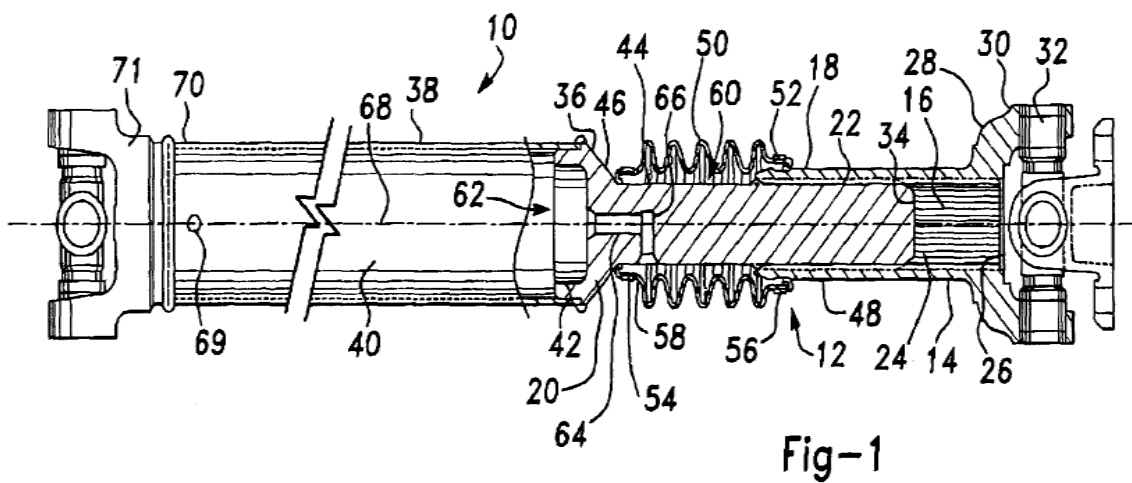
depicts driveshaft assembly 10 that includes slip joint 12. Ex. 1001, 1:66–67. Slip joint 12 includes slipyoke 14, which is a female shaft having internally splined portion 24, bore 16, and first end 18. *Id.* at 2:1–3, 2:10–11. First end 18 of slipyoke 14 slidingly receives first end 34 of studyoke 20, which is a male shaft having externally splined diameter 22. *Id.* at 2:1–3, 2:10–11, 2:18–19. Plug 26 on the end of slipyoke 14 opposite the studyoke retains lubricant within bore 16. *Id.* at 2:5–8. Plug 26 “may be solid, or vented.” *Id.* at 2:8. Second end 36 of studyoke 20 is welded to driveshaft 38, which includes hollow bore 40. *Id.* at 2:21–23. Boot seal 50 prevents contamination of lubricant within the system, and creates cavity 60 between outer diameter 44 of studyoke 20 and boot seal 50. *Id.* at 2:29–31, 2:38–41. As studyoke 20 and slipyoke 14 move axially closer to one another, pressure builds up in cavity 60. Figure 1 depicts one version of vent 62 in studyoke 20, which relieves pressure in cavity 60 by diverting air through vent 62 to cup-shaped end 42 of studyoke 20. *Id.* at 2:45–55.
